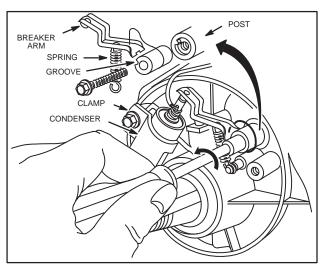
REMOVING STYLE II BREAKER POINTS
